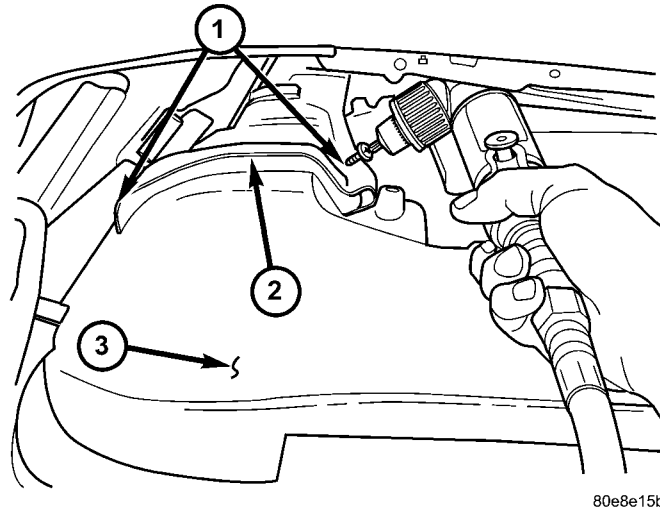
DUCT SCREW LOCATIONS - LEFT SIDE SHOWN
